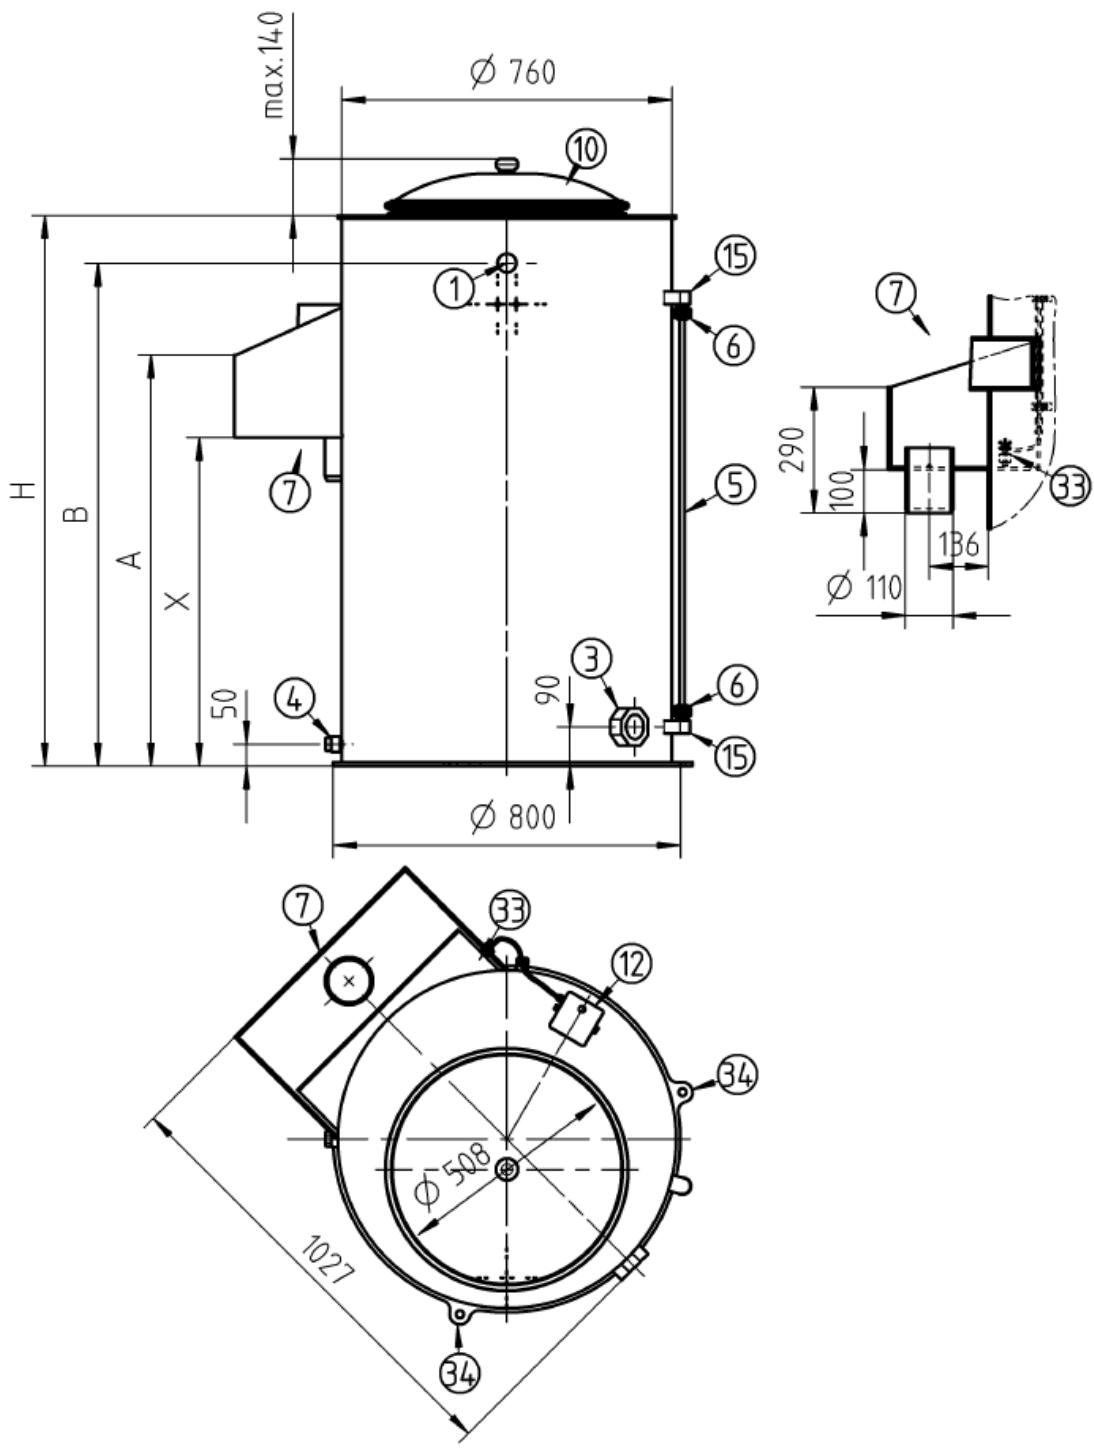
Dimensional drawing of break tank VBH 1500-3000L-angular-GIII
